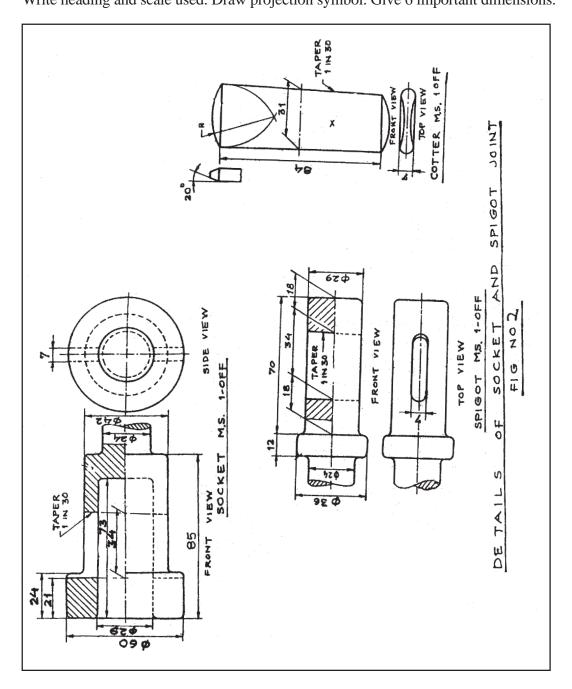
shows the details of the parts of a socket and spigot joint. Assemble these parts correctly and then draw its following views to scale 1:1:
